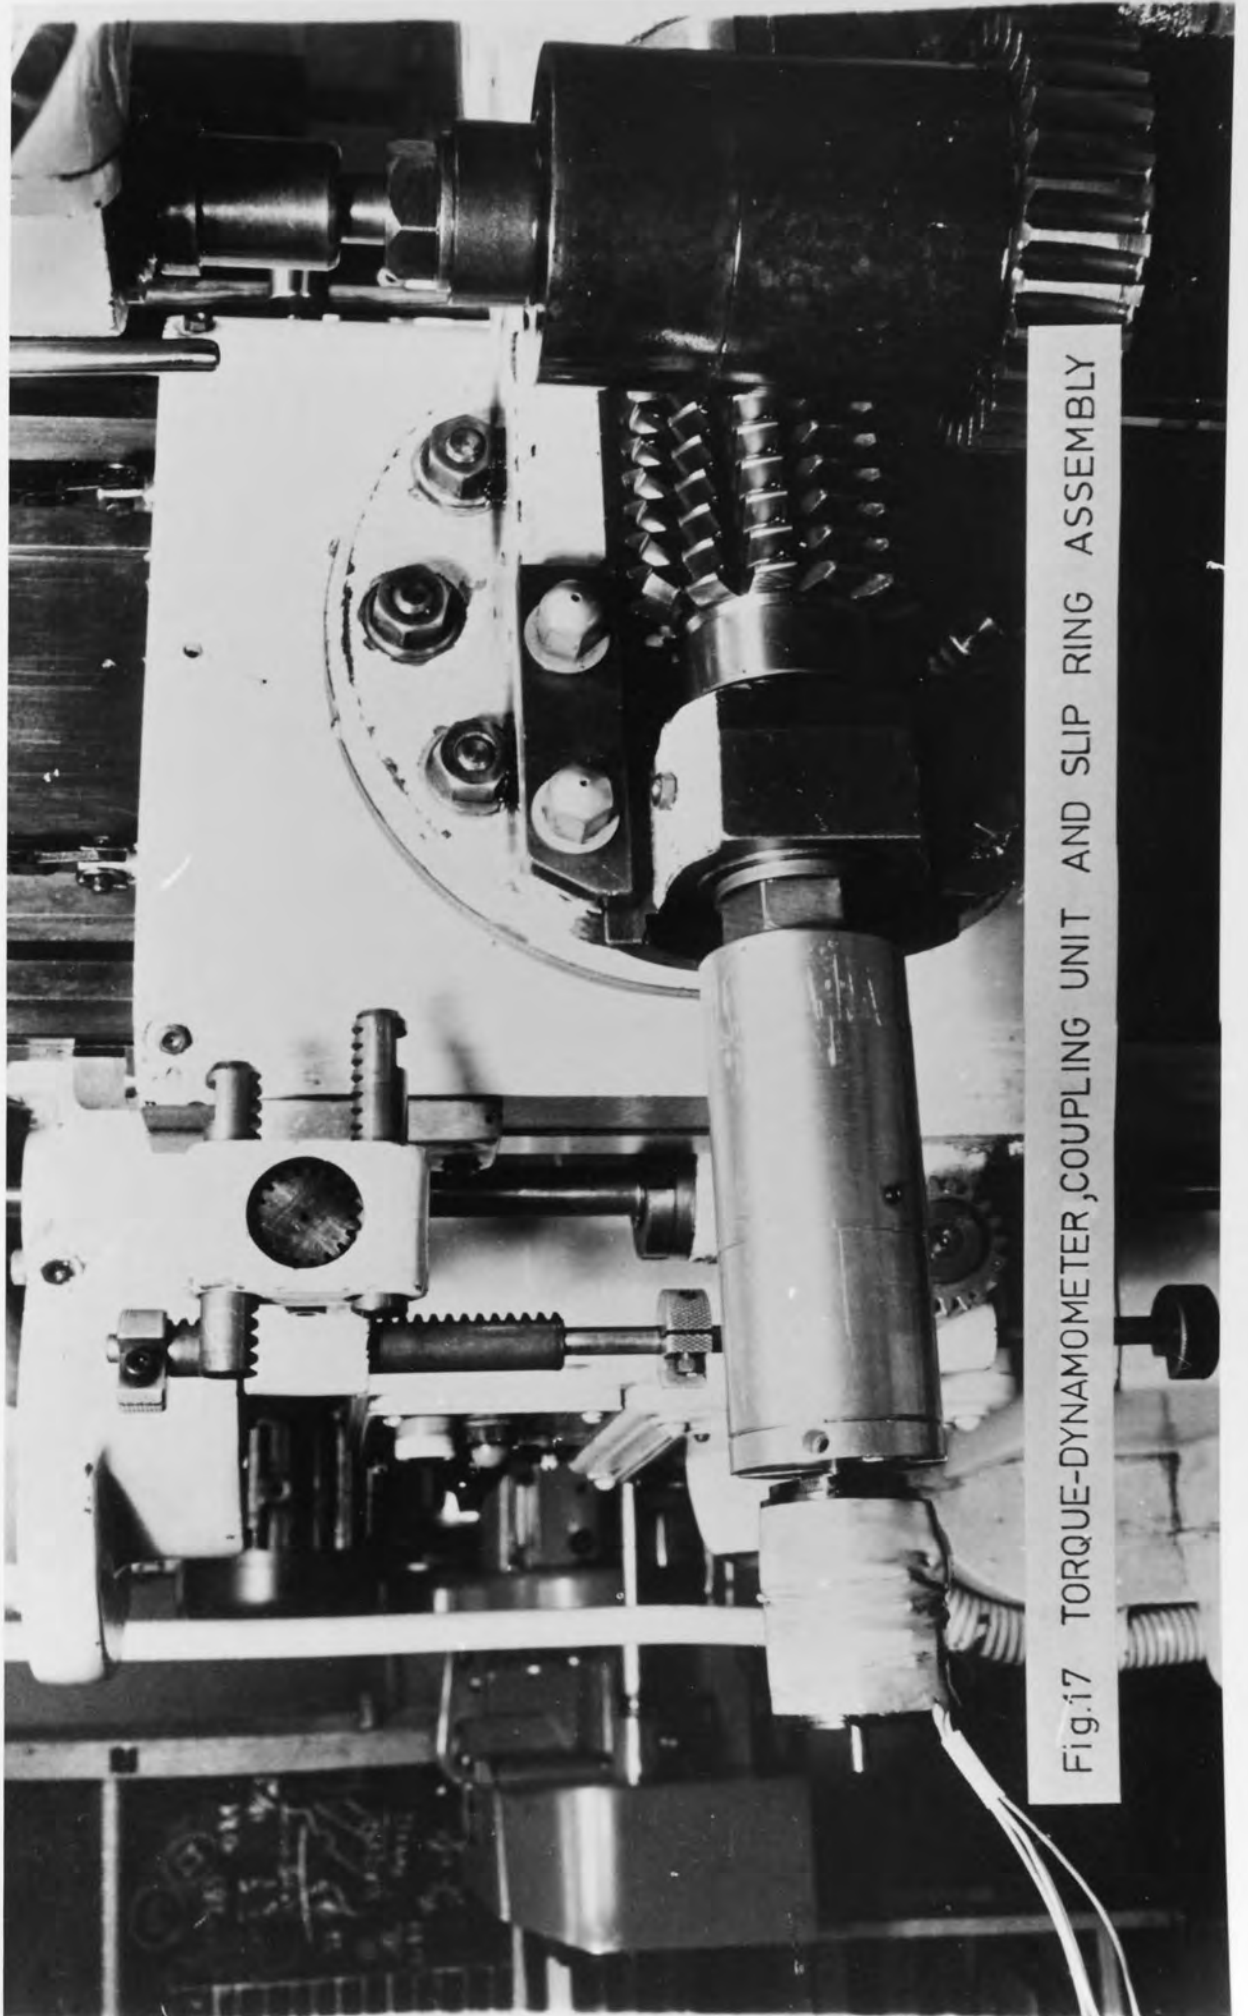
TORQUE-DYNAMOMETER, COUPLING UNIT AND SLIP RING ASSEMBLY
